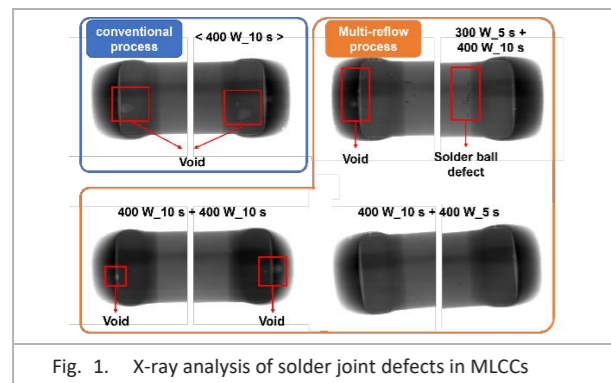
X-ray analysis of solder joint defects in MLCCs
